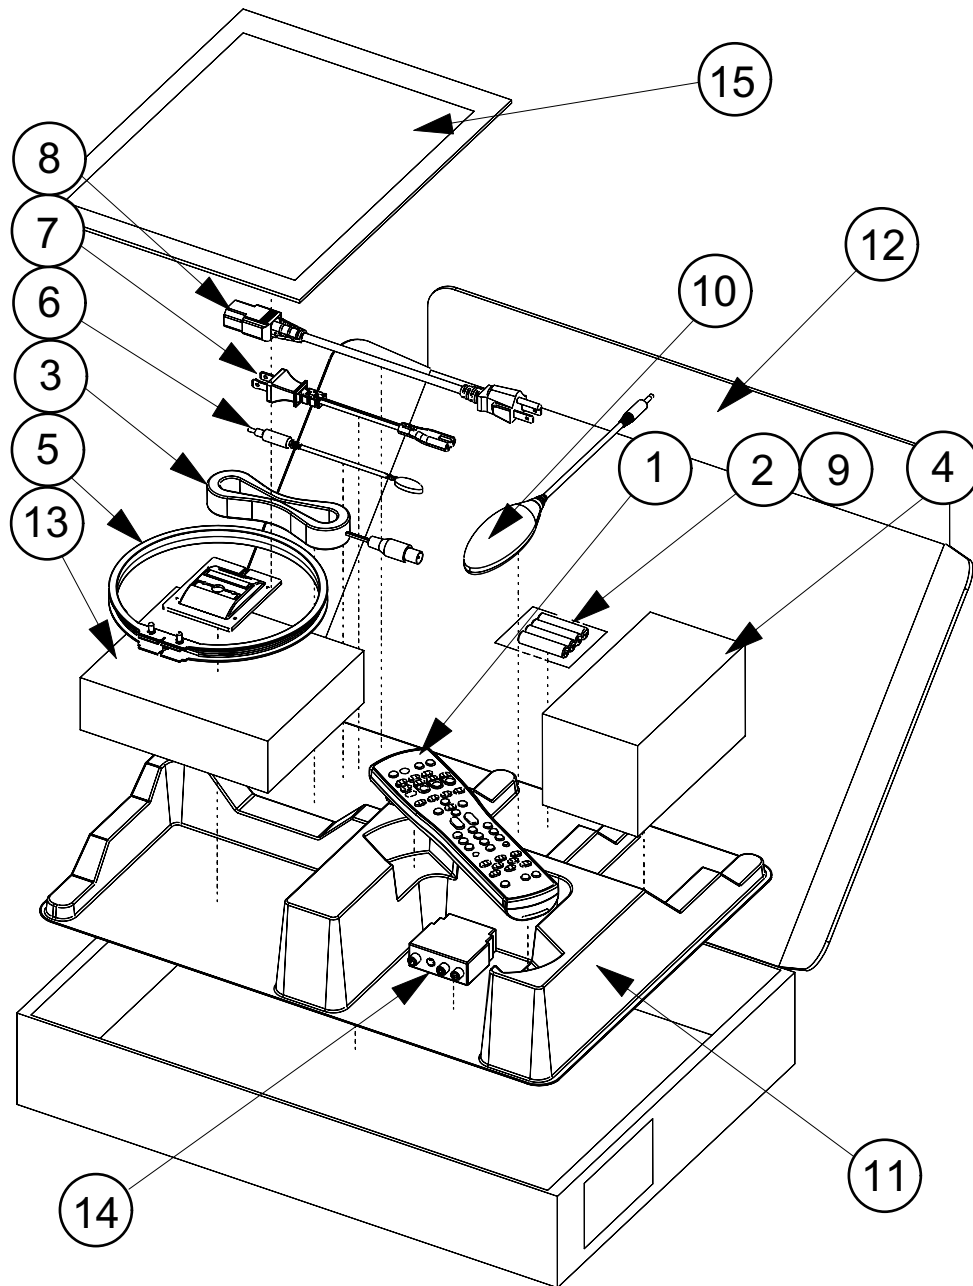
LS18, 28, 35 Essentials Kit Exploded View
